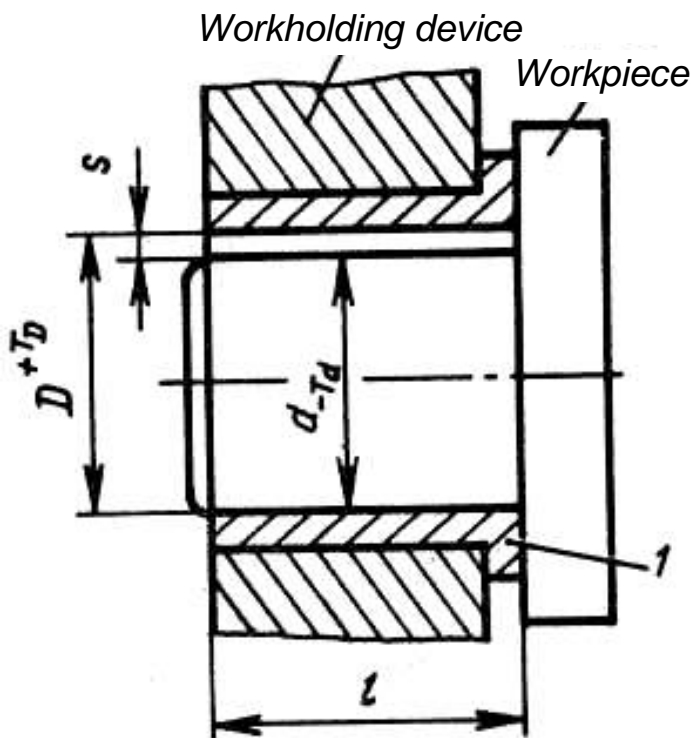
Scheme for mounting of workpiece in cylindrical hole
